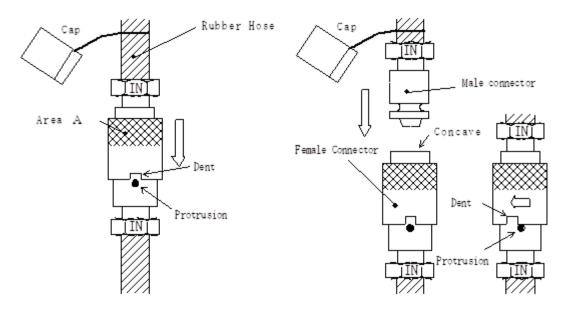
ATTACHMENT/DETACHMENT OF QUICK CONNECTOR
